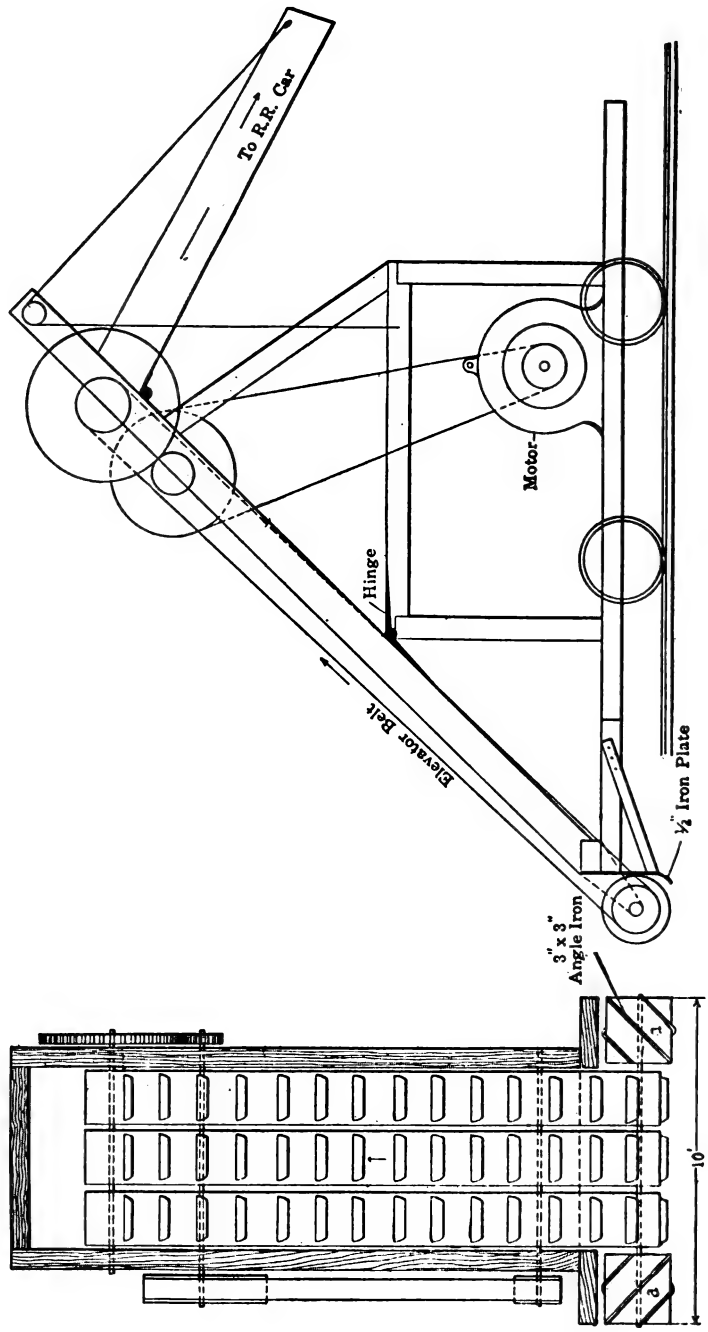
FRONT AND SIDE VIEW OF TAILINGS ELEVATOR IN THE JOPLIN DISTRICT.
